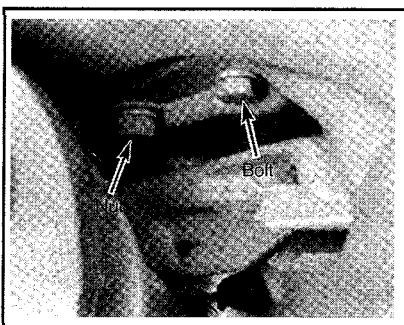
On 90° CV4 motors, loosen the nut and bolt at the front port and starboard sides
